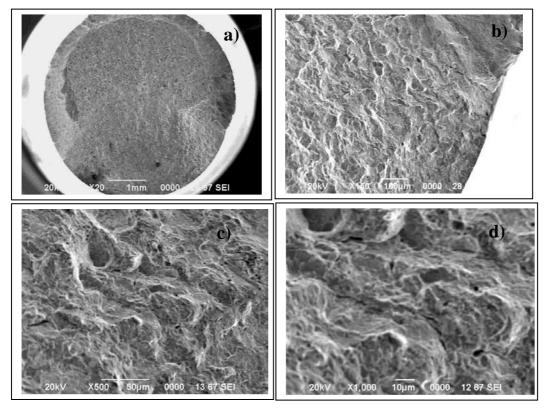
Fracture for 50% of the yield stress, showing the fatigue fracture surfaces with magnifications: 20X (a) 150X (b) 500X (c) 1000X and (d)
